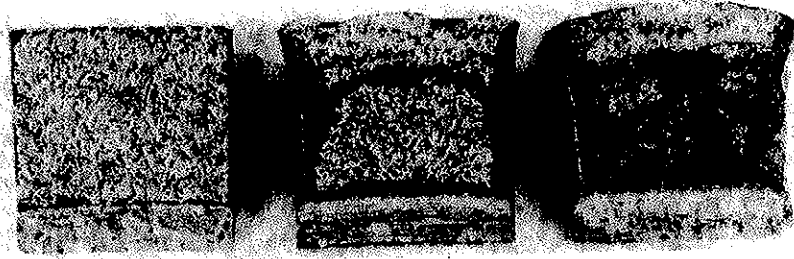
Combinations of fracture modes are shown by fracture surfaces of three impact test specimens which were broken at different temperatures. On the left, fracture is mostly shear; in the center, combined shear and cleavage; and on the right, cleavage. (Courtesy of D. J. Wulpi, International Harvester Company.)
